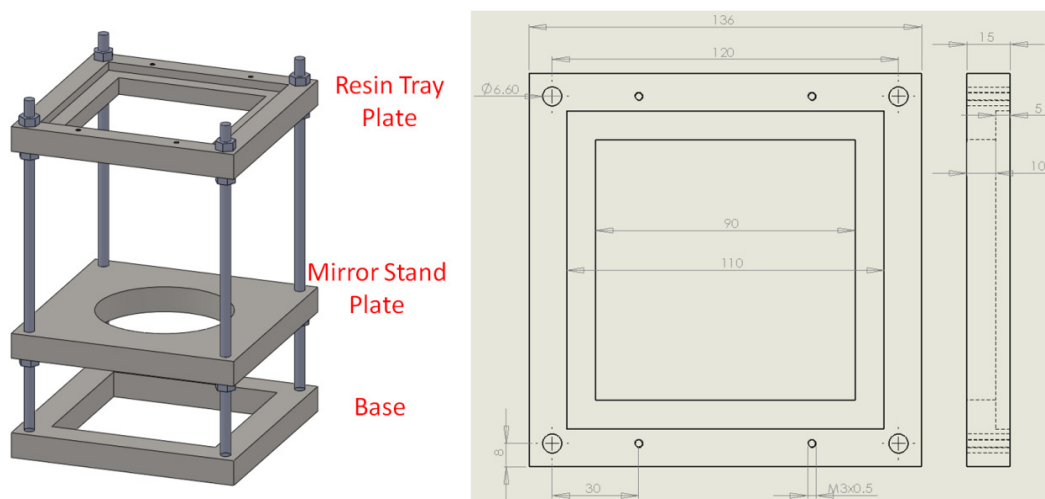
CAD image of resin tray stand (left) and schematic drawing of resin tray platform for the custom MSL system (right) (dimensions in mm)
